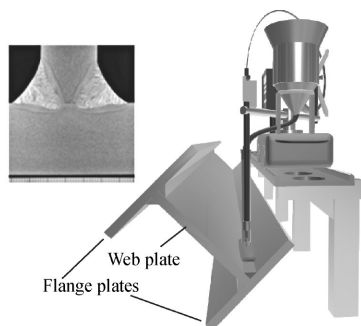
Fillet welding of welded H-beam assembly (submerged arc welding in a flat position) and an example cross-section of a weld joint
